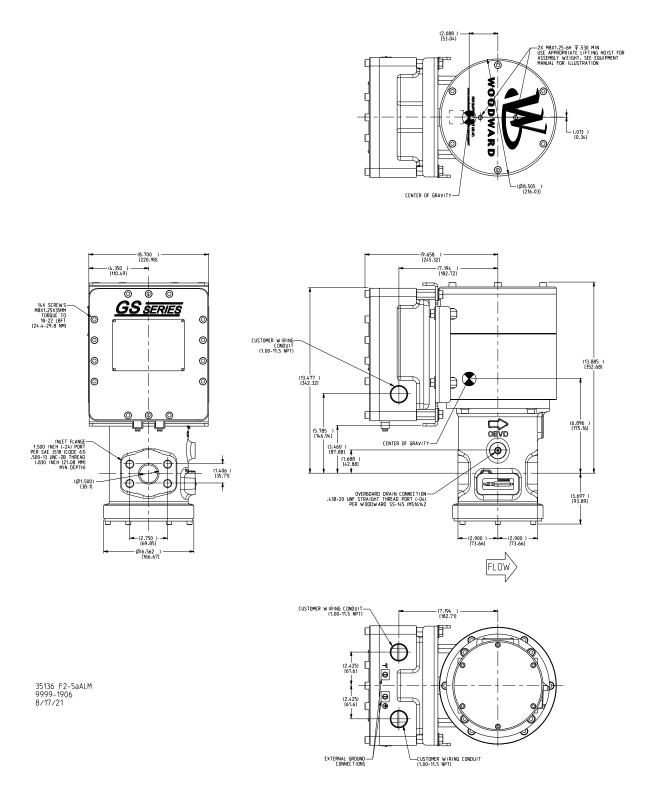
Outline Drawing Aluminum GS40 with Conduit Entries
